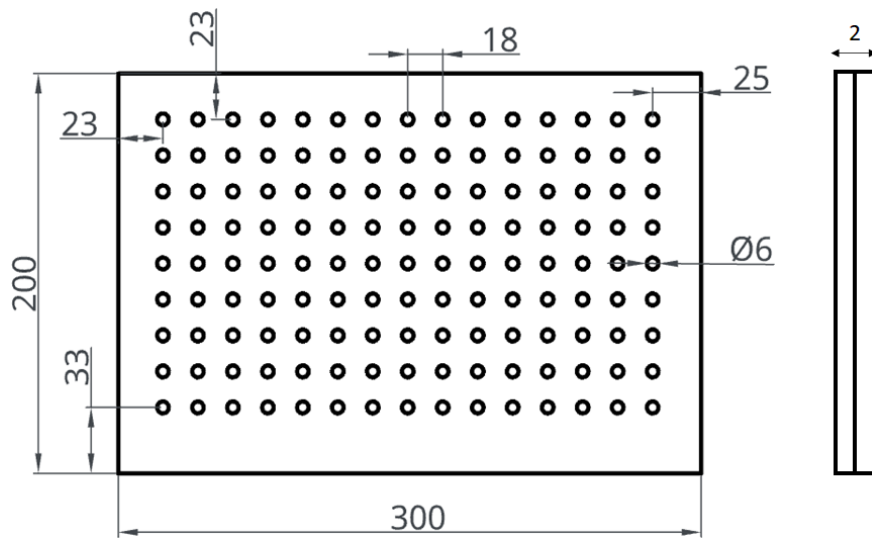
Edge and weld spacing distances used on the panel welds for the endurance test according to the AWS D9.8 M standard.
